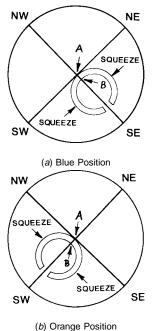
Split Ring Section Used in Establishing Stress Sense and Proper Specimen Orientation
